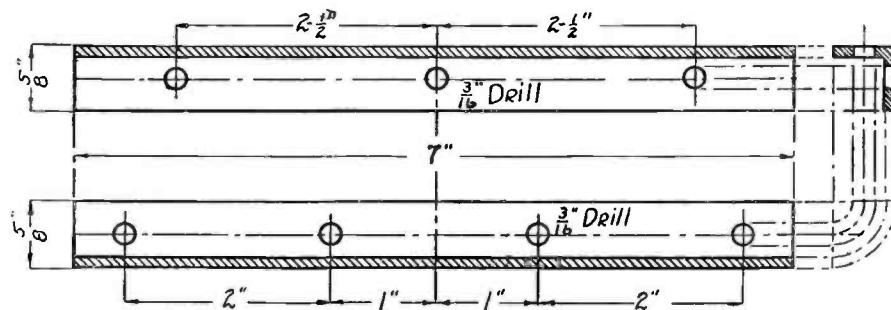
The bracket supporting the shelf is drilled in the manner shown herewith for the best mounting arrangement.
